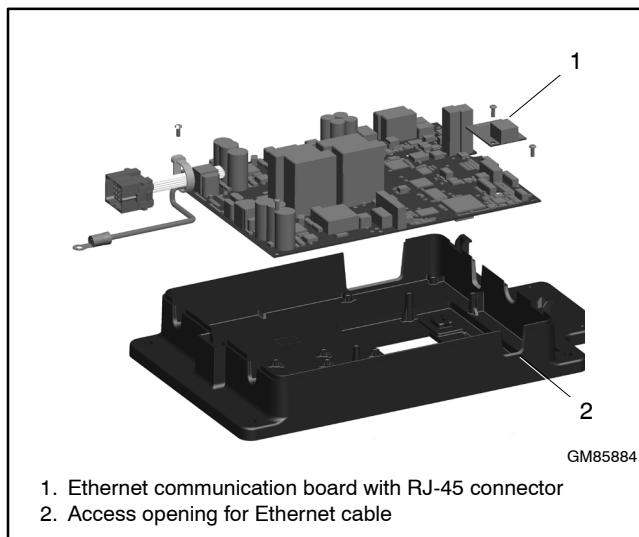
Ethernet Board (controller cover removed for illustration only)
